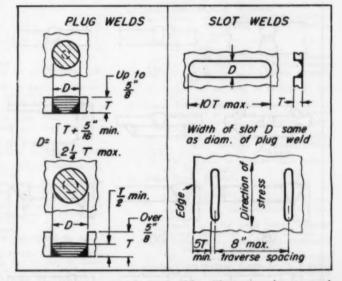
Proportions of plug welds. These may be stressed in shear at the working stresses allowed for fillet welds
